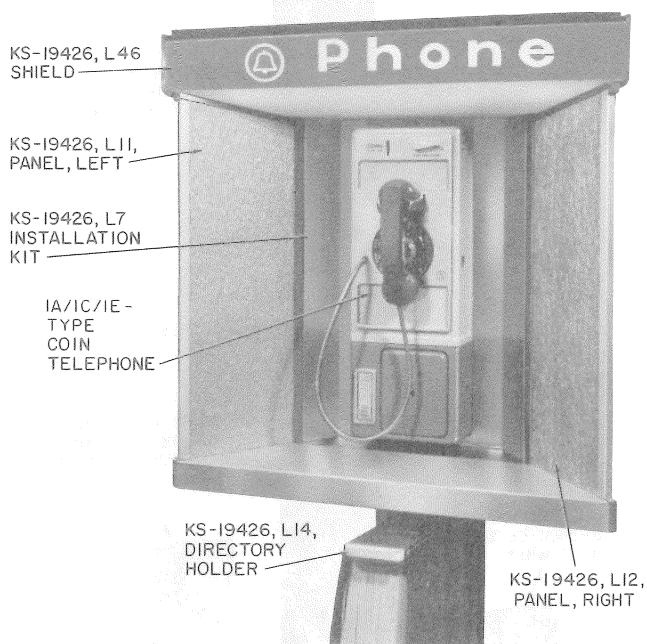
KS-19426 Mounting Using 1-Type Coin Telephone Set
